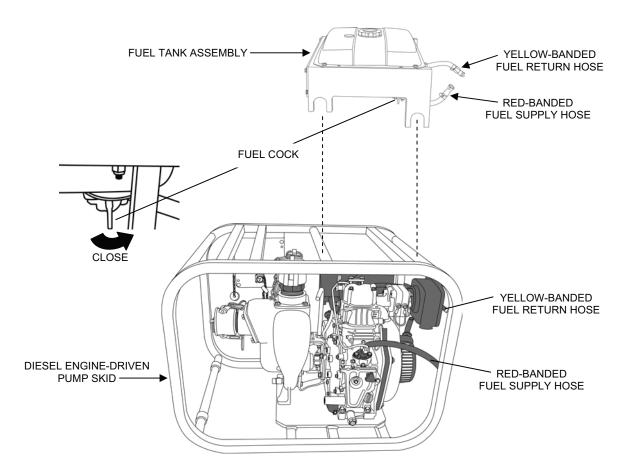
Raw Water Pump P-1 Skid Fuel Tank Assembly Removal.
